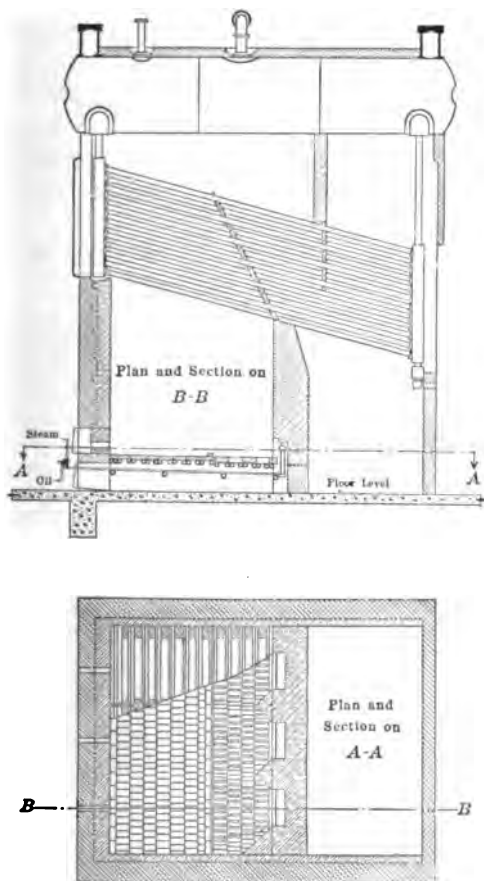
The Hammel patent oil burning furnace with boiler raised to give large combustion chamber.
